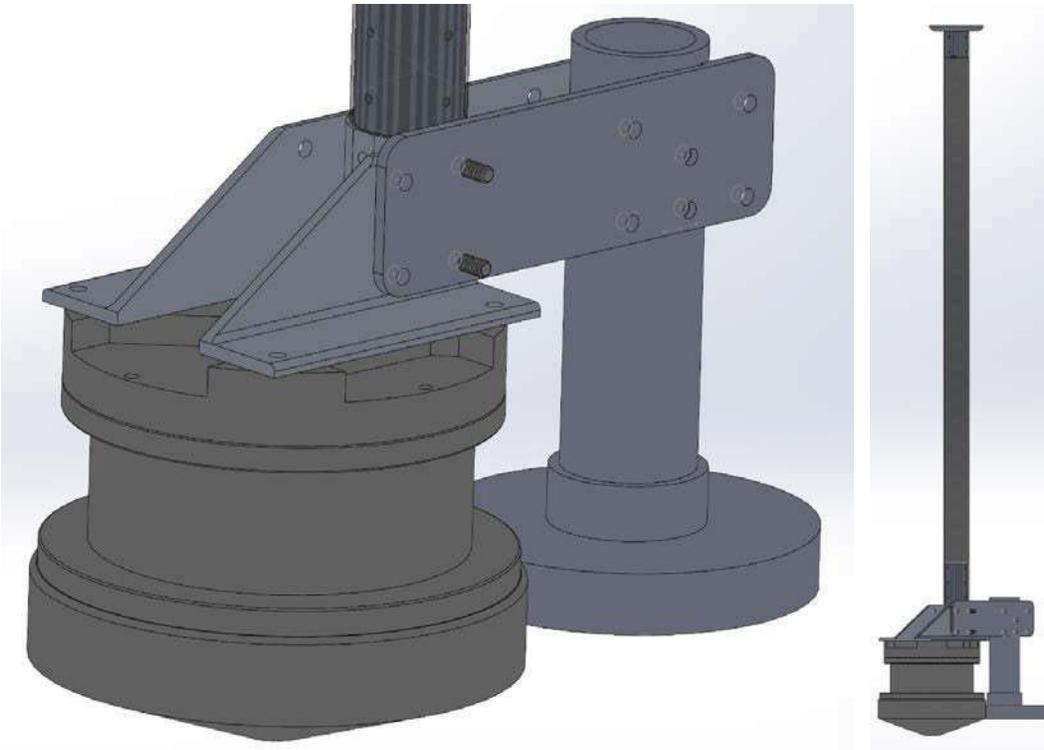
ADCP and echo sounder sensor assembly CAD model
